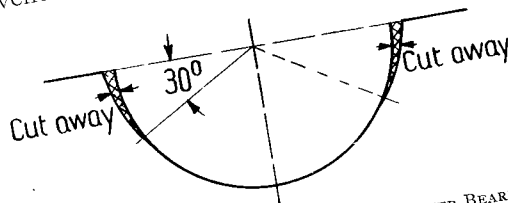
OUTLINE SHOWING CHAMFERING OF LOWER BEARING
